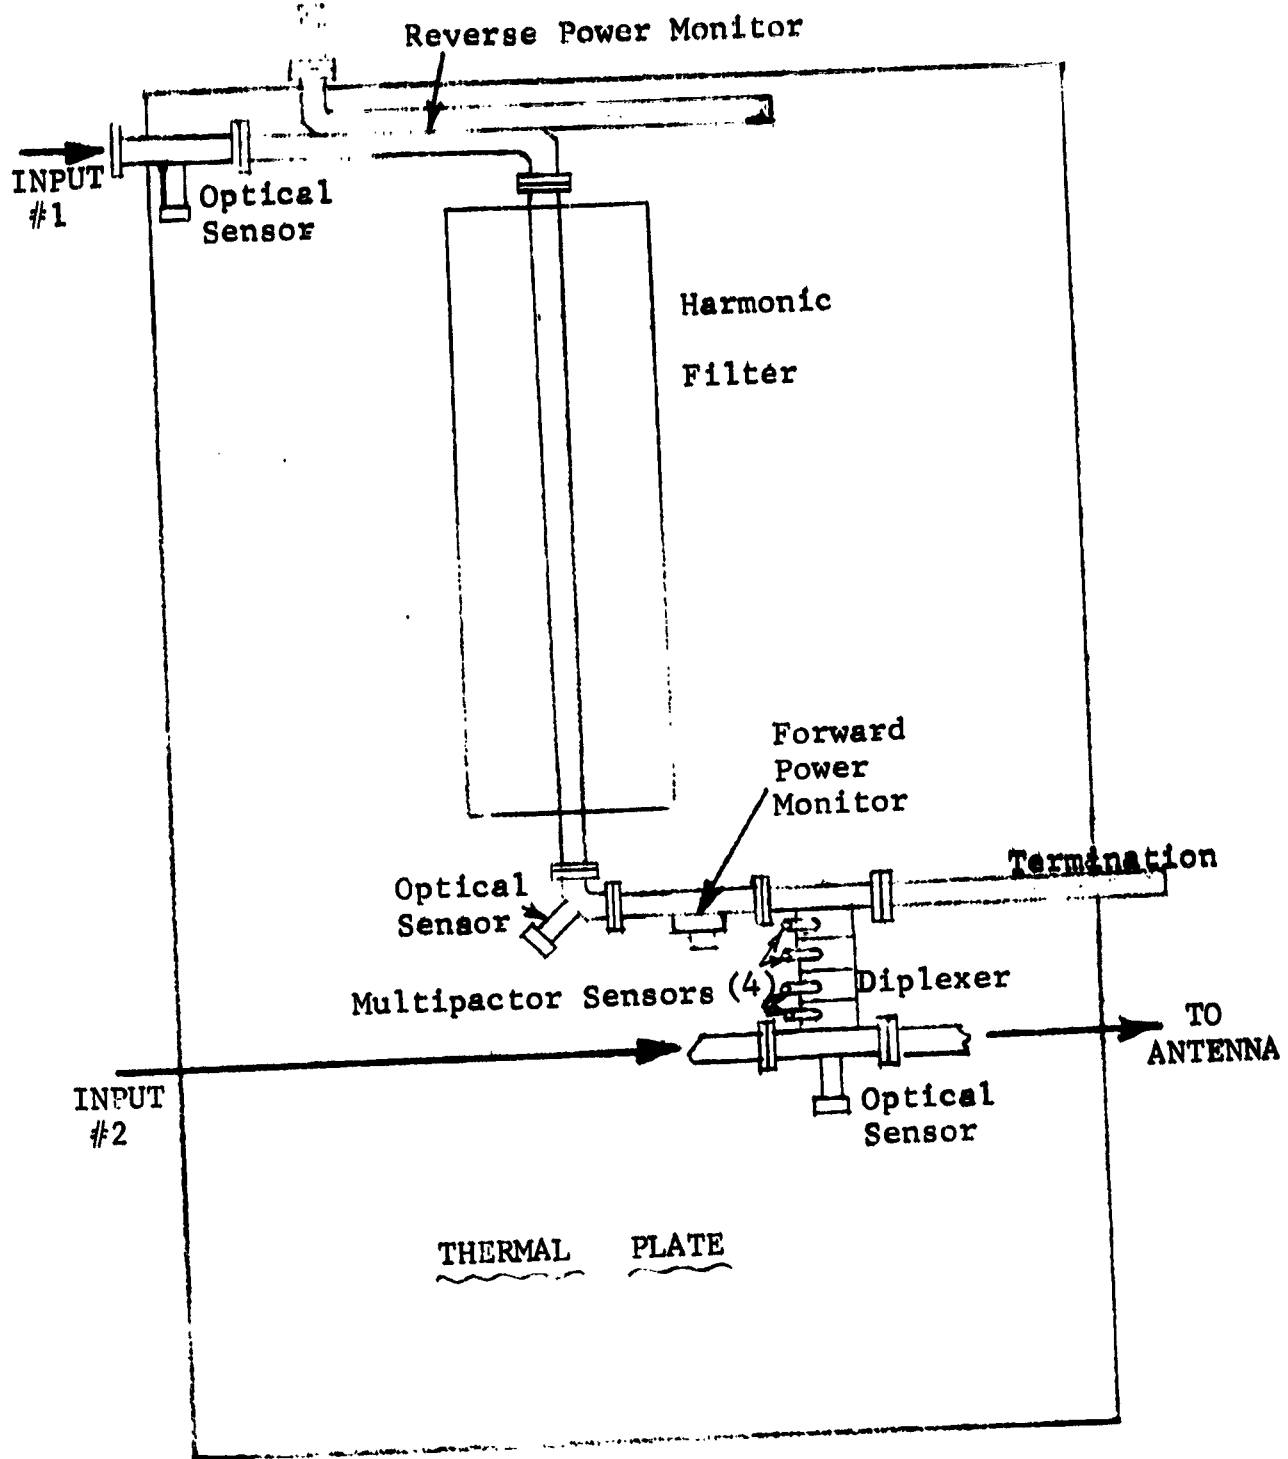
WAVEGUIDE COMPONENTS ASSEMBLY LAYOUT
